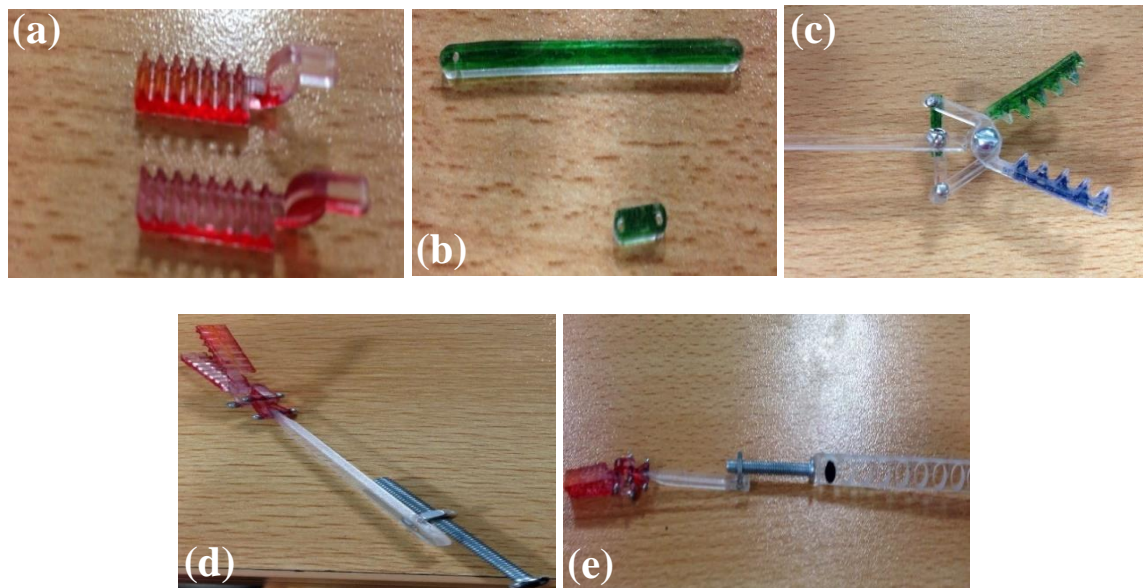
Illustrating different parts of the prototype fabricated using Laser, (a) Grasper Jaws A & B (b) Long bar & short bar, (c) Assembled grasper jaws with scissor link mechanism, (d) Assembled closed Grasper with the lead screw and magnetic array, (e) Opened
